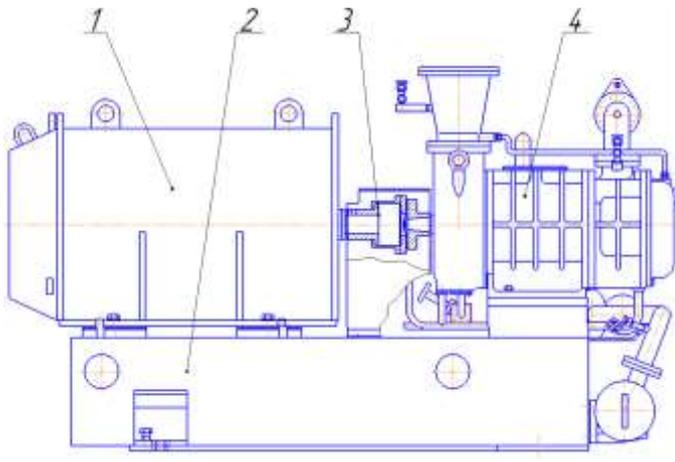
Compressor unit: 1- drive; 2 - frame; 3 - coupling; 4 - screw compressor
